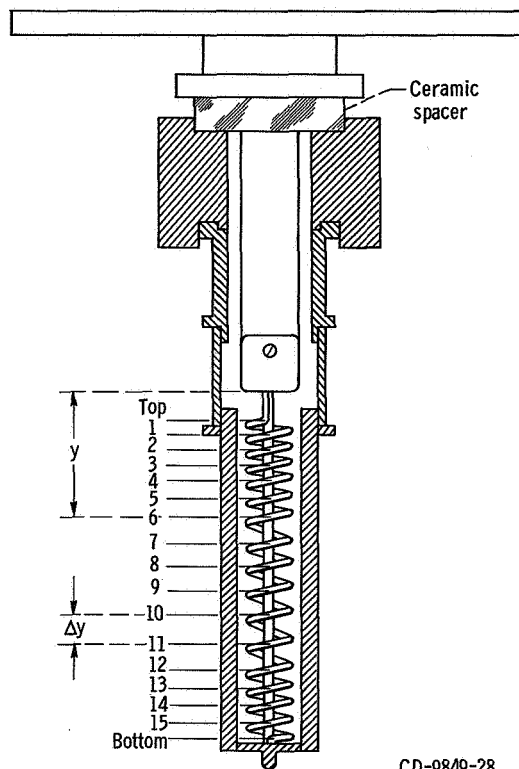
Cross-sectional view of filament setting fixture showing winding positioning pins.
